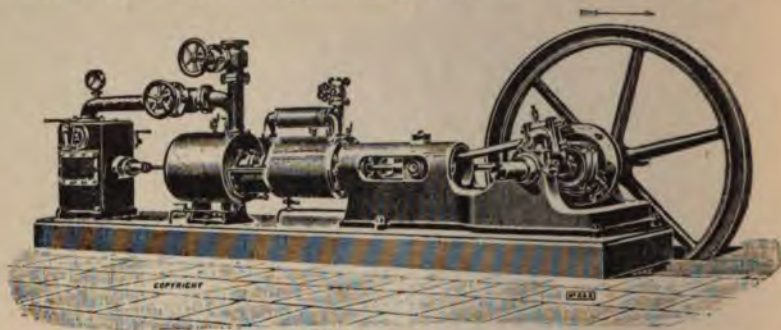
Horizontal Tandem Compound Condensing Engine, made by E. R. and F. Turner. The Condenser is mounted on the same Bed-plate as the Engine, and the Air-pump is worked from the Tail Shaft. The High-pressure Cylinder is in front in this case.
